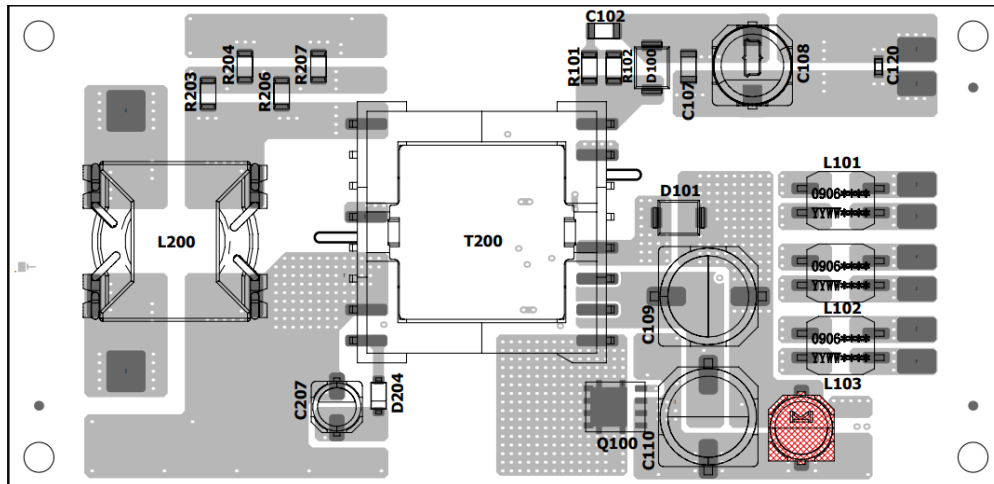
DER-1030Q Board Assembly (Top).⁴
